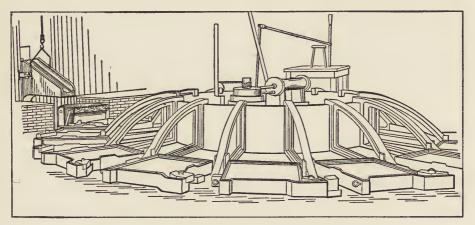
THE WALKER ANODE CASTING MACHINE
